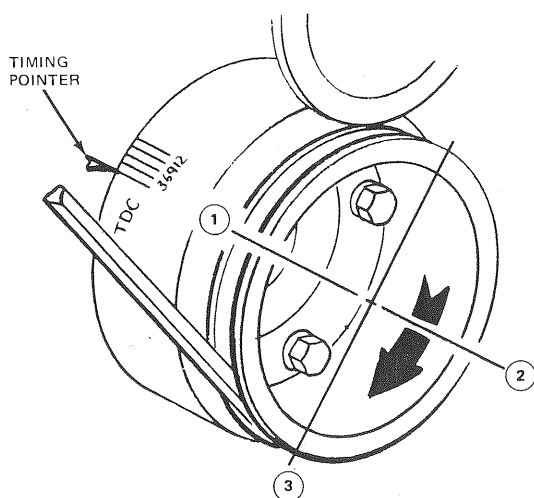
Checking Valve Clearance Hydraulic Valve Lifters
